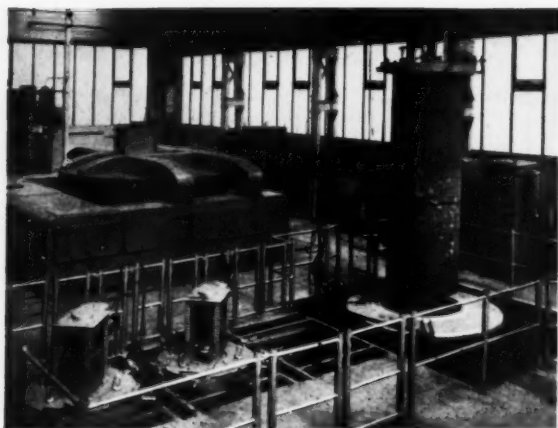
Pit pot furnace showing container being lowered into the furnace chamber.
